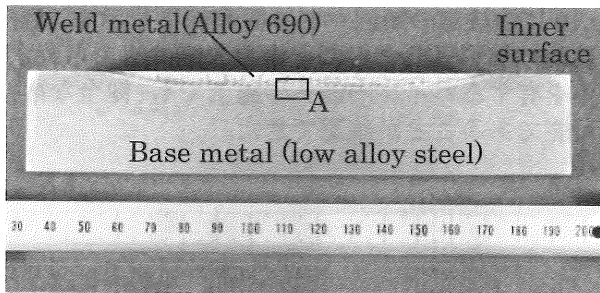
Cross-sectional observation of temper bead weld on inner surface groove of φ700 diameter test pipe (groove depth : 4mm)
